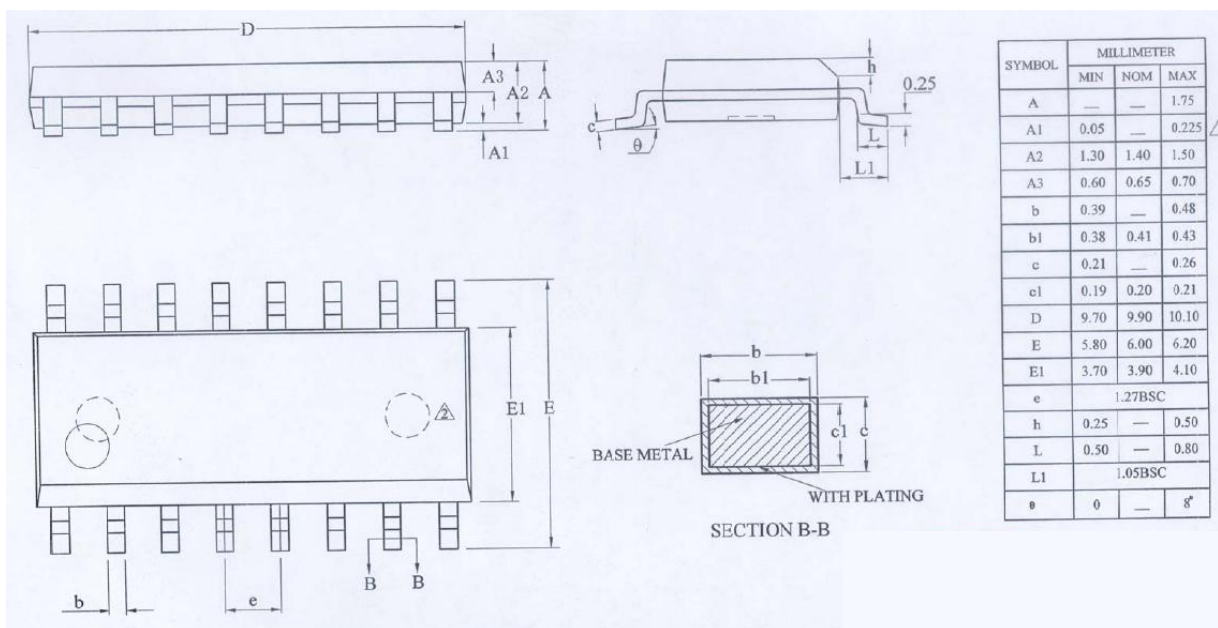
AX1073/AX1073B SOP16 package dimensions
